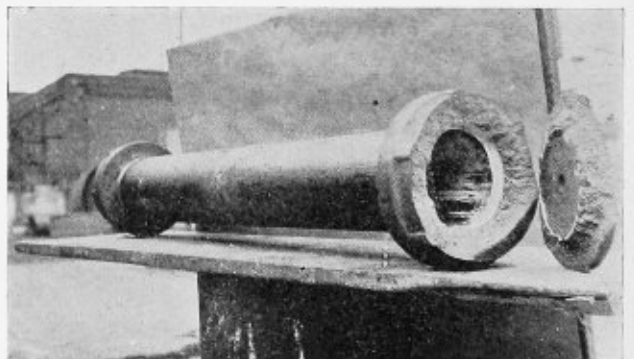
4-Inch Pipe with Oxy-Acetylene Welded Cap which Gave Way at 4,400 Pounds Hydrostatic Pressure, the Weld Still Holding
